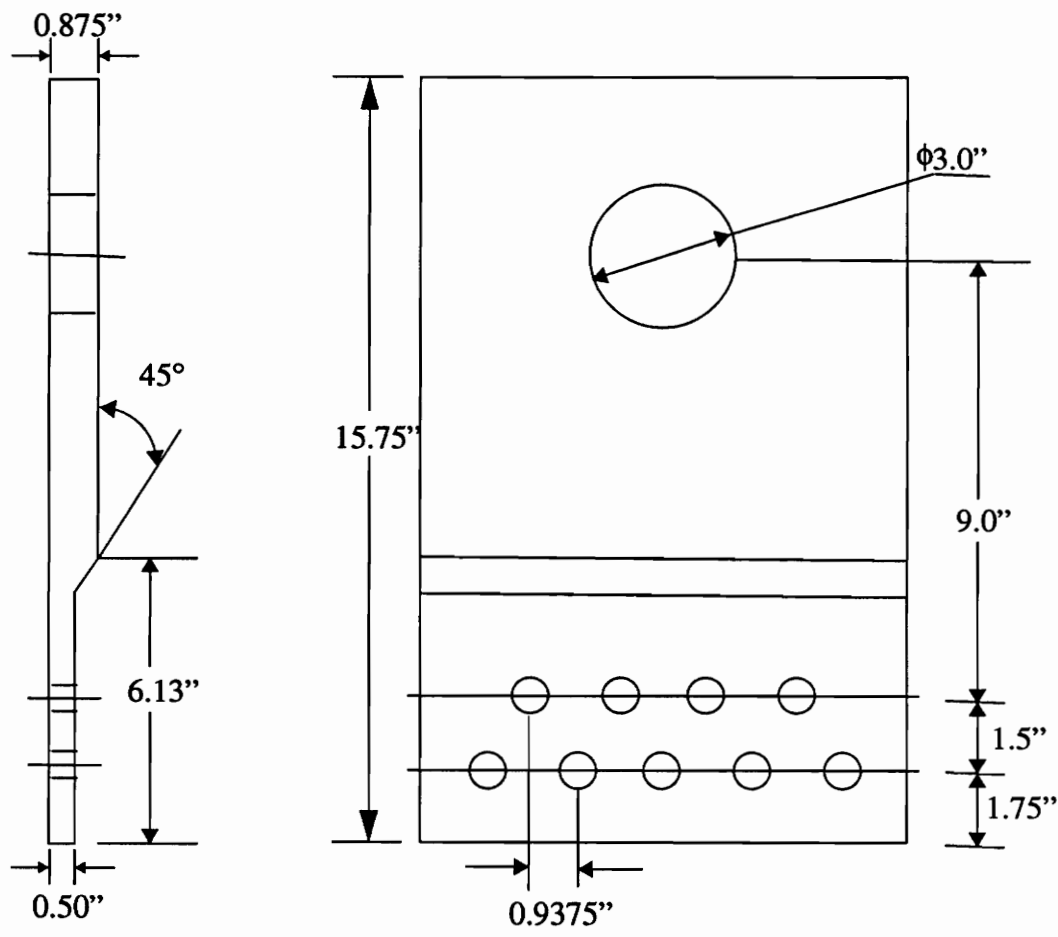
Dimensional details of the steel laps for 5- and 9-hole inboard specimens
